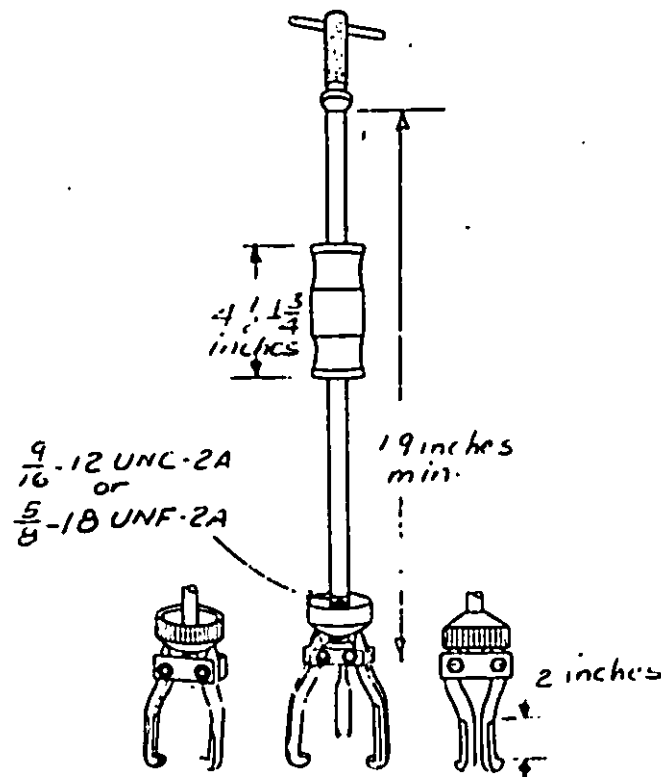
Type III, class 2, style A, puller, mechanical, slide hammer, gear and bearing, two- and three-jaw, external and internal, light duty.
